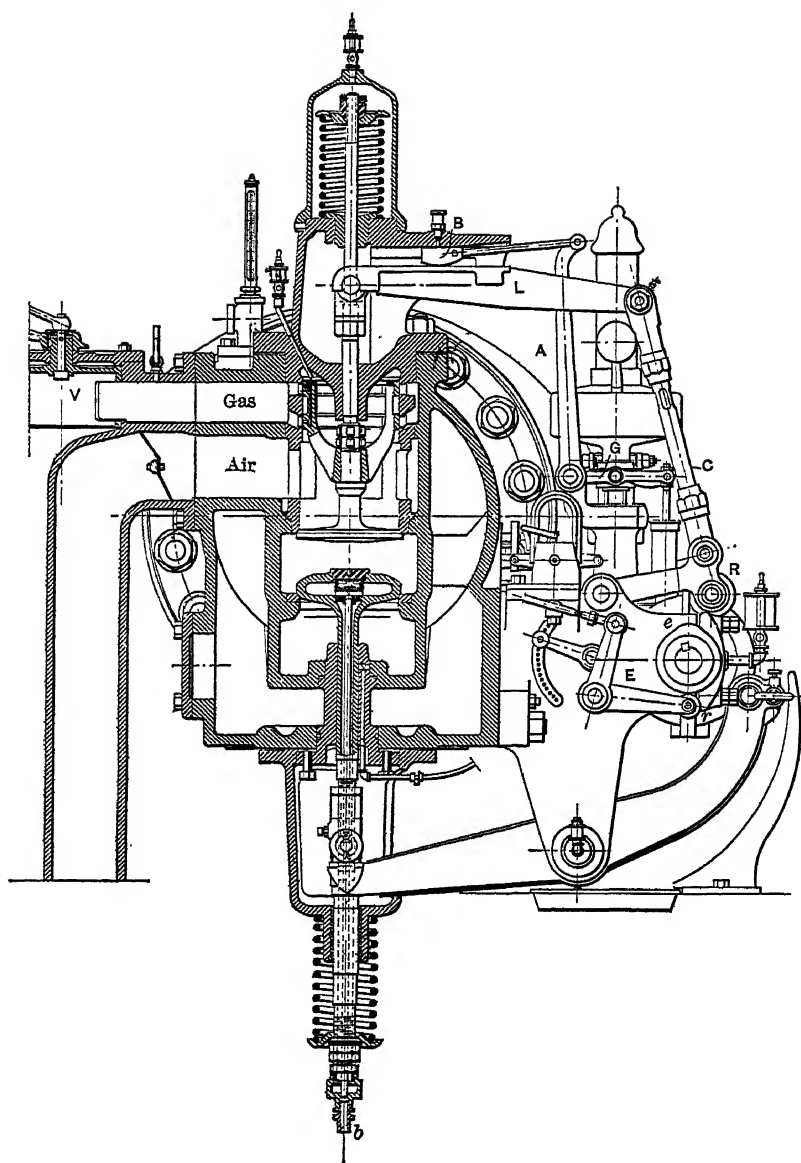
Olds Valve Gear. Section through Combustion-Chamber.
